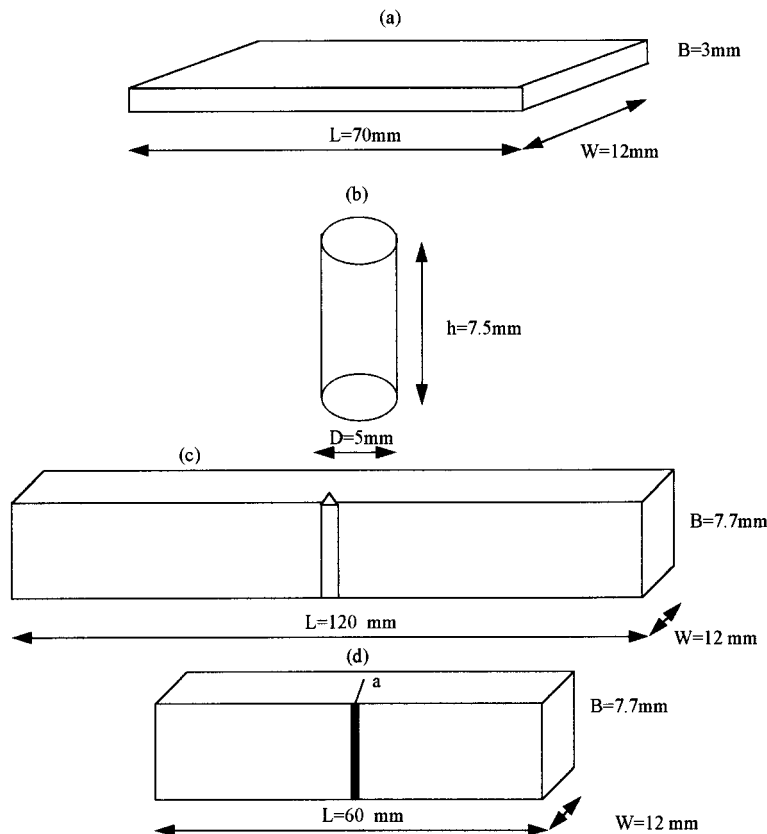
Geometry of the test specimens to be used in the measurement of mechanical properties: (a) bending; (b) compression; (c) impact; (d) fracture.
